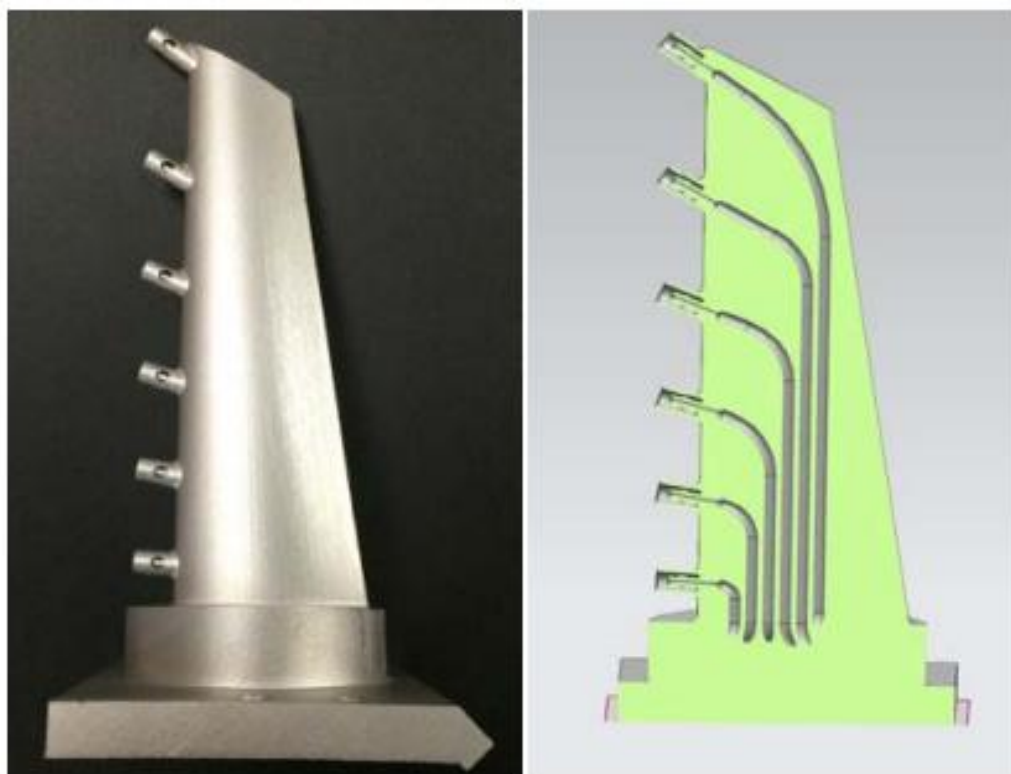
Inlet Booster in one piece without welding – Honeywell. (Godfrey, 2015)
